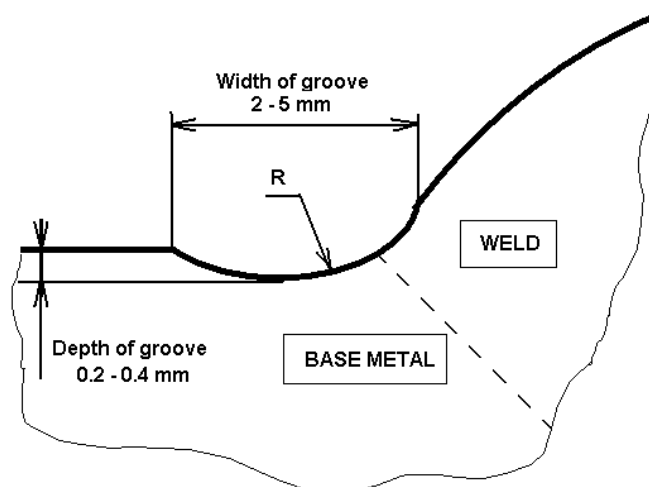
Profile of weld toe improved by Ultrasonic Peening
